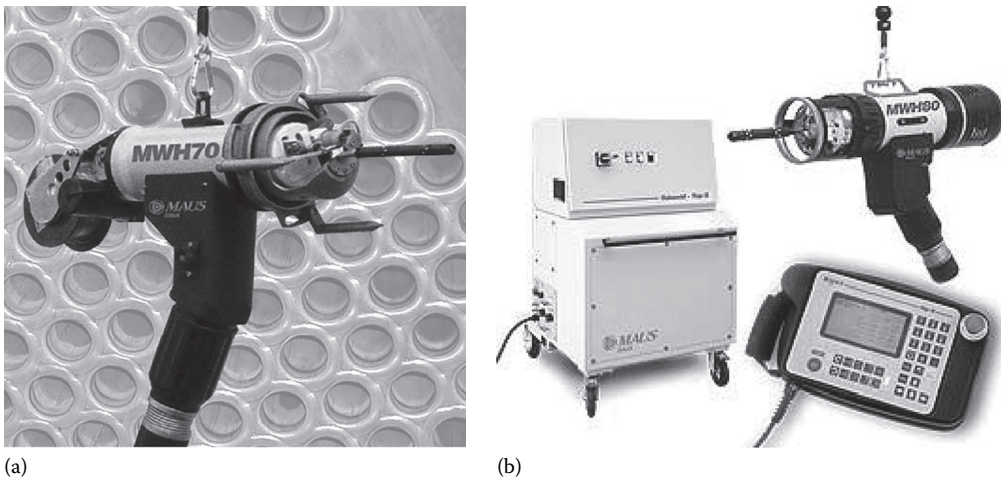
Tube-to-tubesheet TIG orbital welding head. (a) Weld head and (b) power source and teach pendant. (Courtesy of Maus Italia F. Agostino & C.s.a.s., Bagnolo Cremasco (Cr), Italy.)
